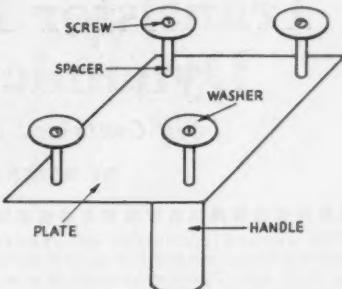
Tool suggested for winding the secondary pies. The corner posts around which the wire is wound should be spaced so that the finished pie will fit snugly on the bobbin.
